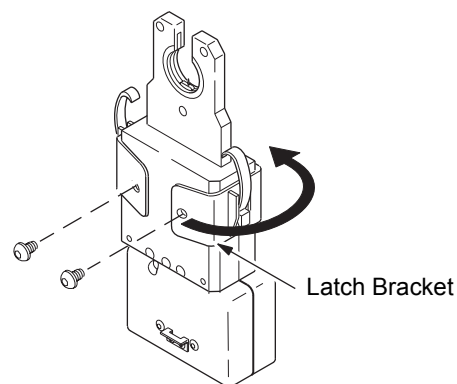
Removing Series 8 Micro Weld Head Latch Bracket
